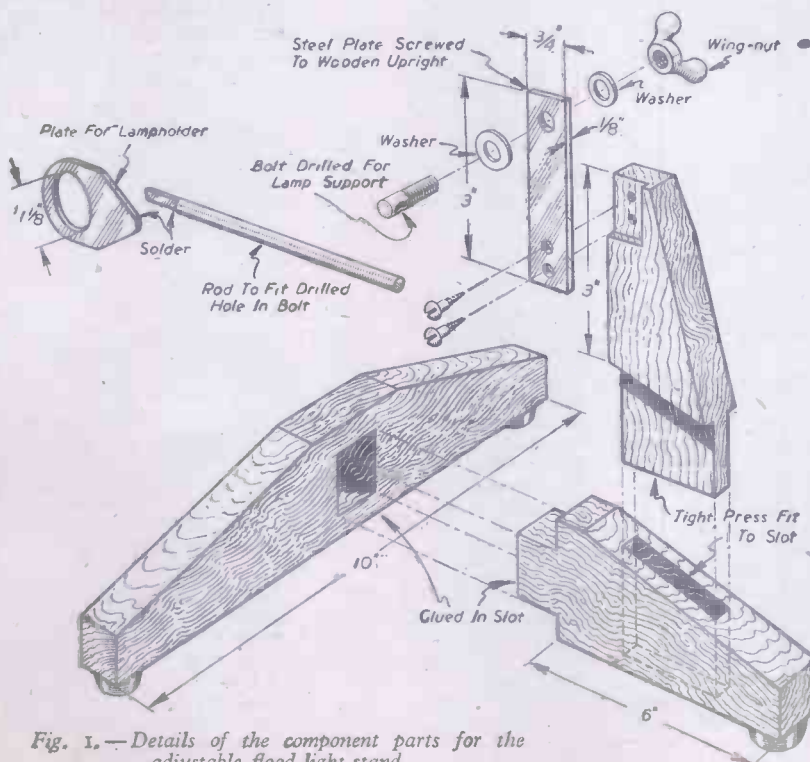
Details of the component parts for the adjustable flood-light stand.
